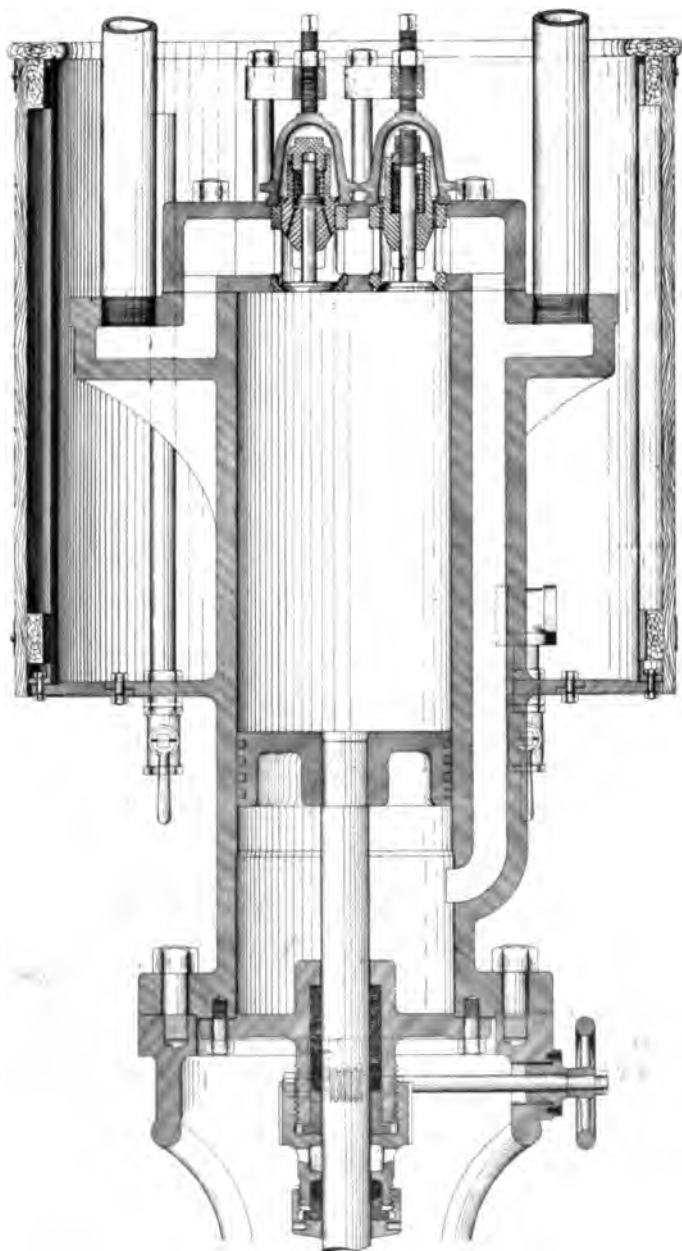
BOYLE COMPRESSOR, PENNSYLVANIA IRON WORKS CO.,
